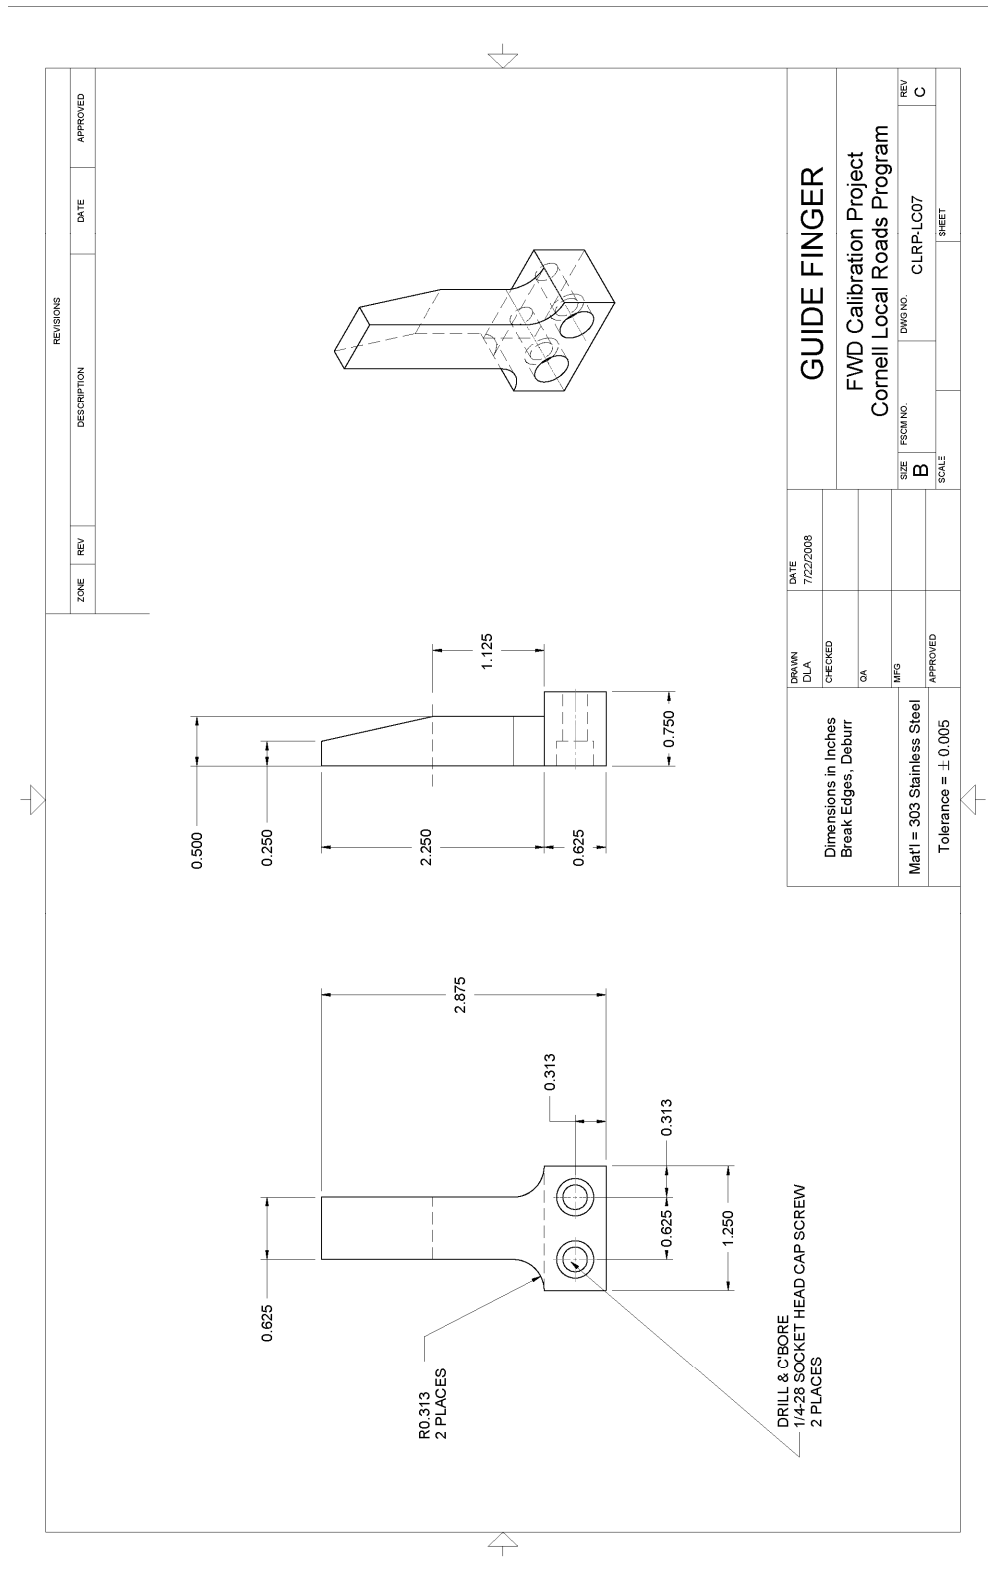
Drawing. CLRP-LC07 Guide Fingers.
